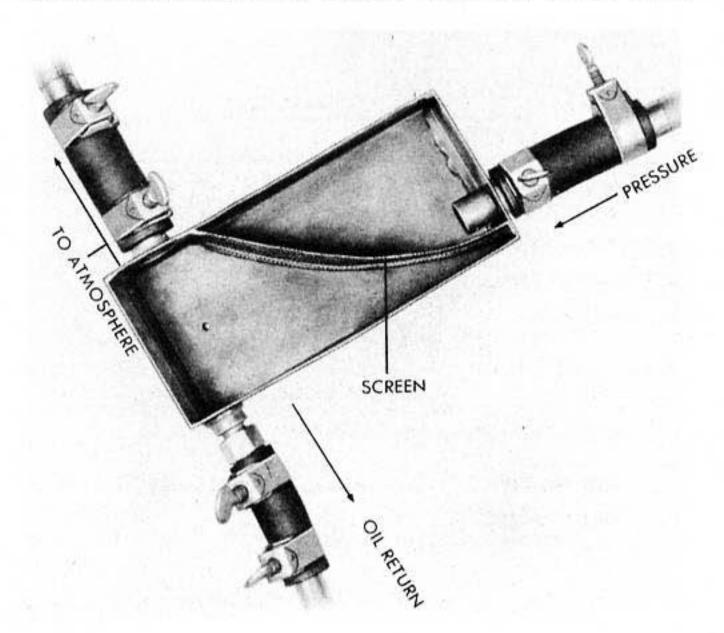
OIL SEPARATOR - CUTAWAY VIEW
